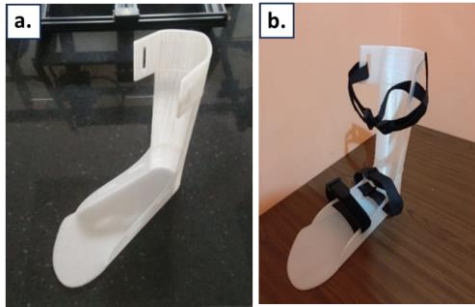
(a) 3D printed AFO using FDM and PP material (b) AFO prototype after assembly
